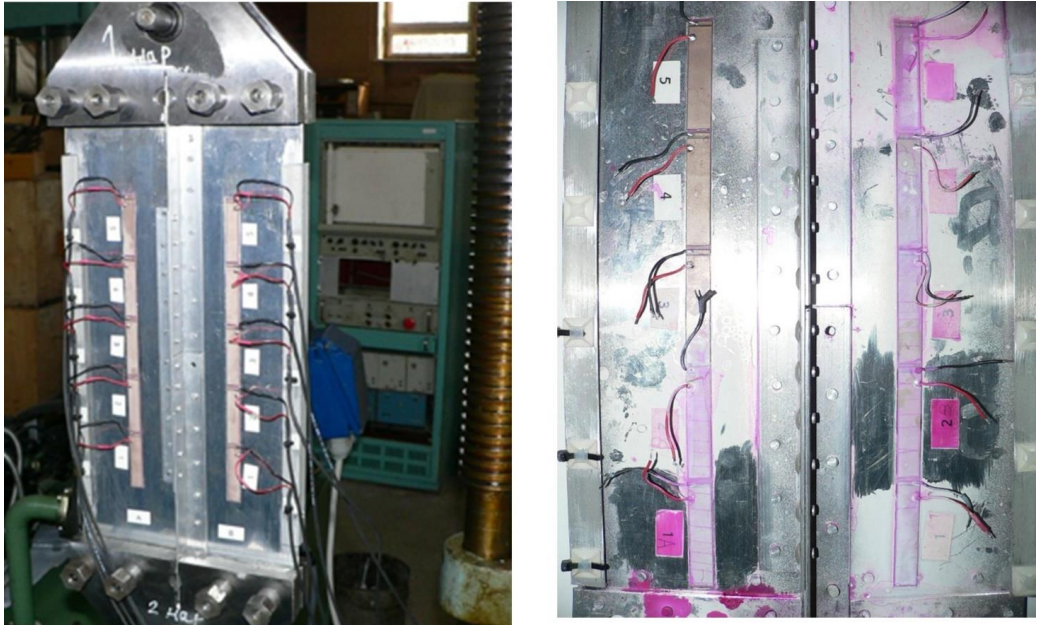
Forced panel prepared for fatigue test and installed for the fatigue test to machine GRM-20 (left picture) and the view of panel after penetration test for finding out of crack in Piezoelectric transducer (PZT) transducers.
